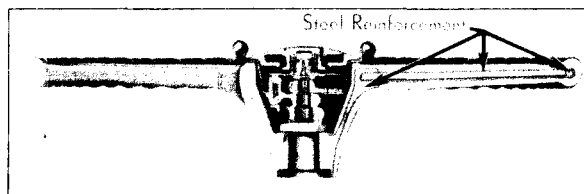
The steel core of the hub, the spokes and the rim are welded into one piece
